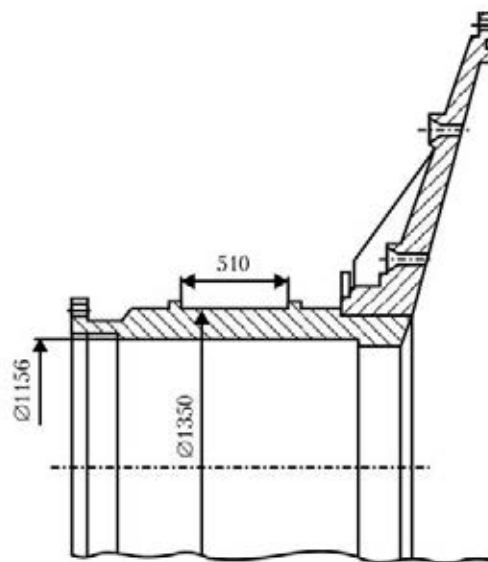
Surfacing of mill journal by semi-automatic welding machine and journal draft
